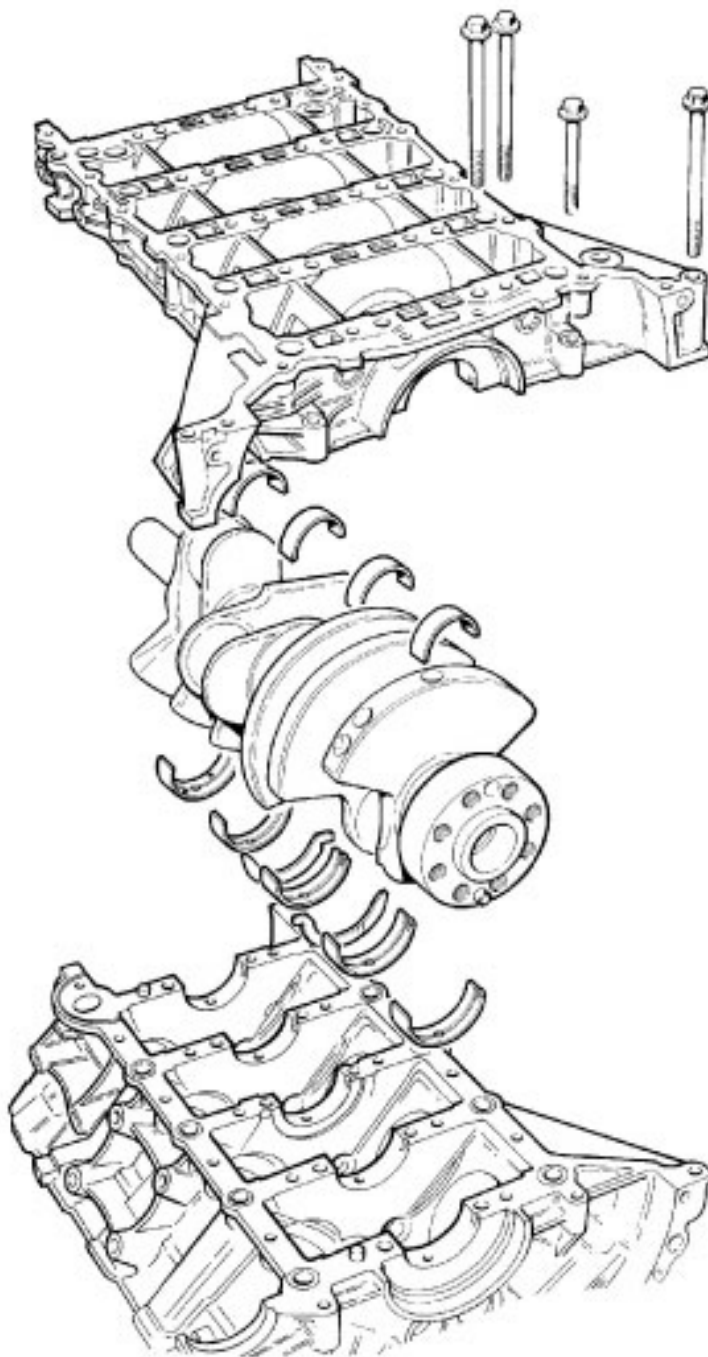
CYLINDER BLOCK, CRANKSHAFT AND BEDPLATE
